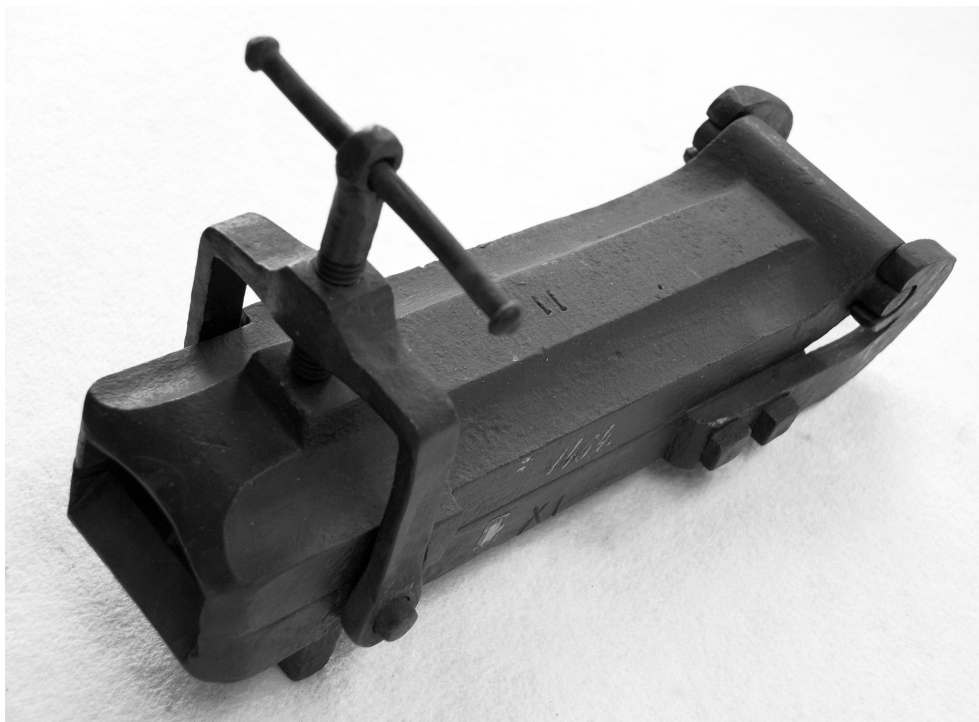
Iron mould for casting of two strips. From the mint in Copenhagen before 1889.
